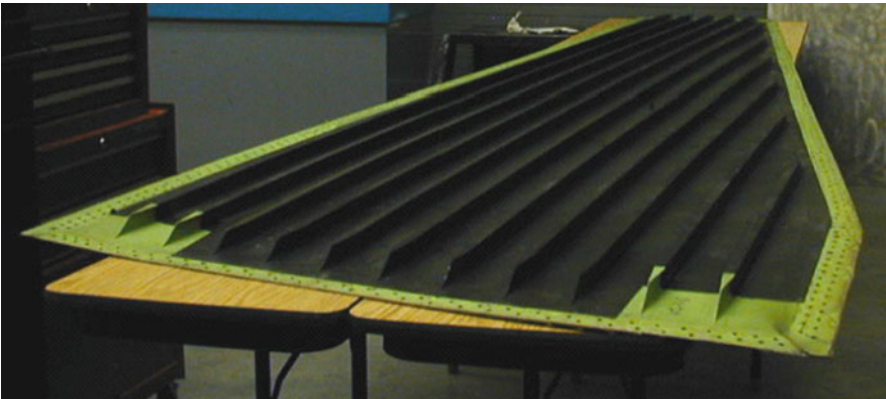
B-737 R/H composite stabilizer upper skin, after disassembly
